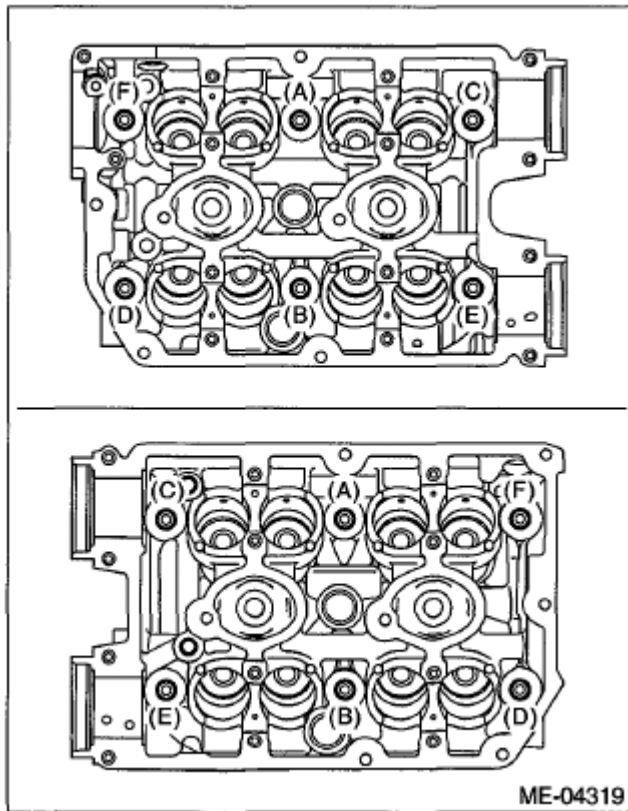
Identifying Cylinder Head Bolts Tightening Sequence
